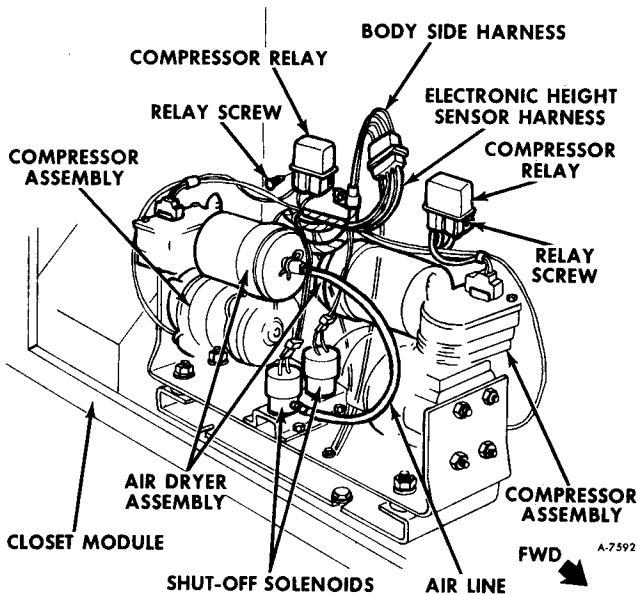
Compressor Wiring—Electro-Level II (MOTORHOME)
